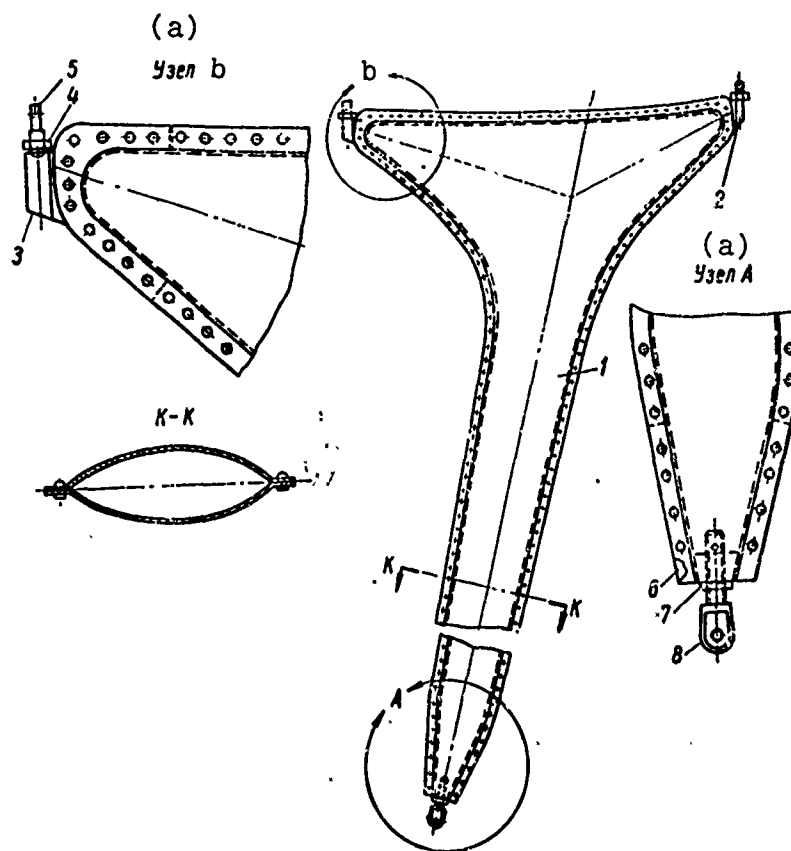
Stabilizer strut: 1 - side wall of strut; 2 - rear fitting of strut; 3 - front fitting of strut; 4 - lock nut; 5 - fork-type bolt; 6 - lower fitting of strut; 7 - lock nut; 8 - fork-type bolt.
